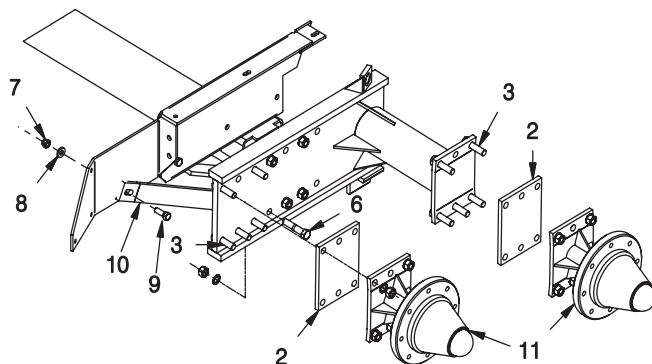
Mounting Spacer Plate, Hub & Spindles
